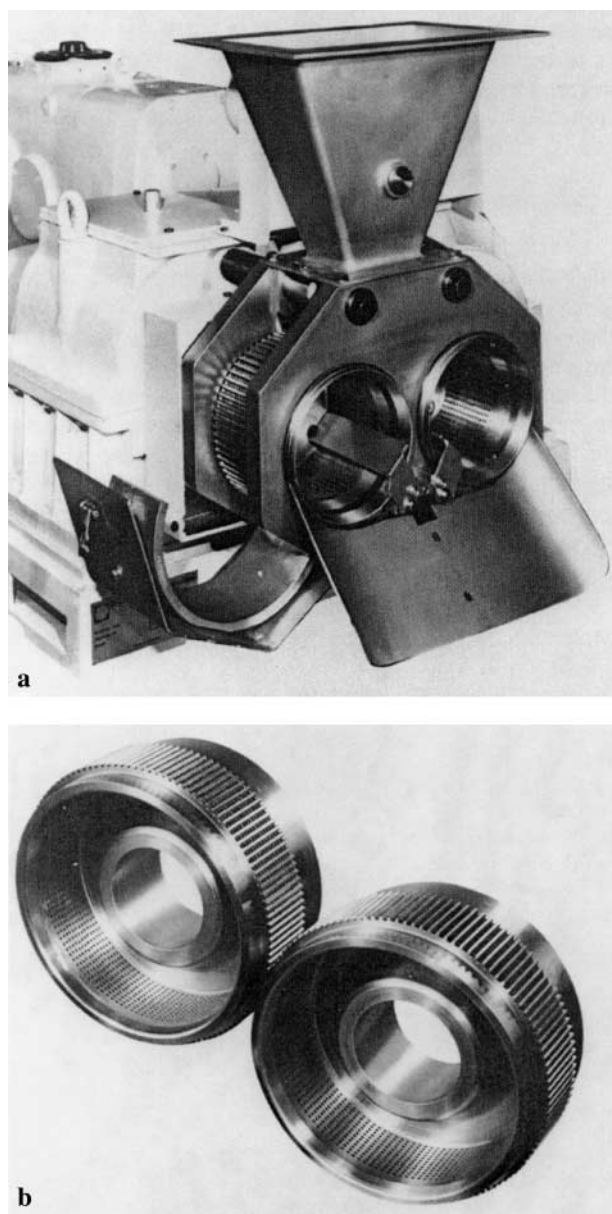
(a) Rotary-gear extruder. (b) Gear-toothed cylinders.
